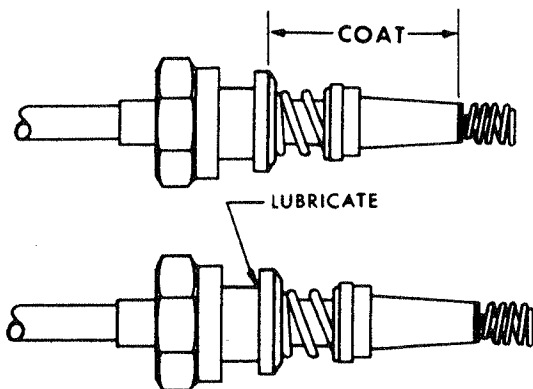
A. COATING INSULATING SLEEVE.
